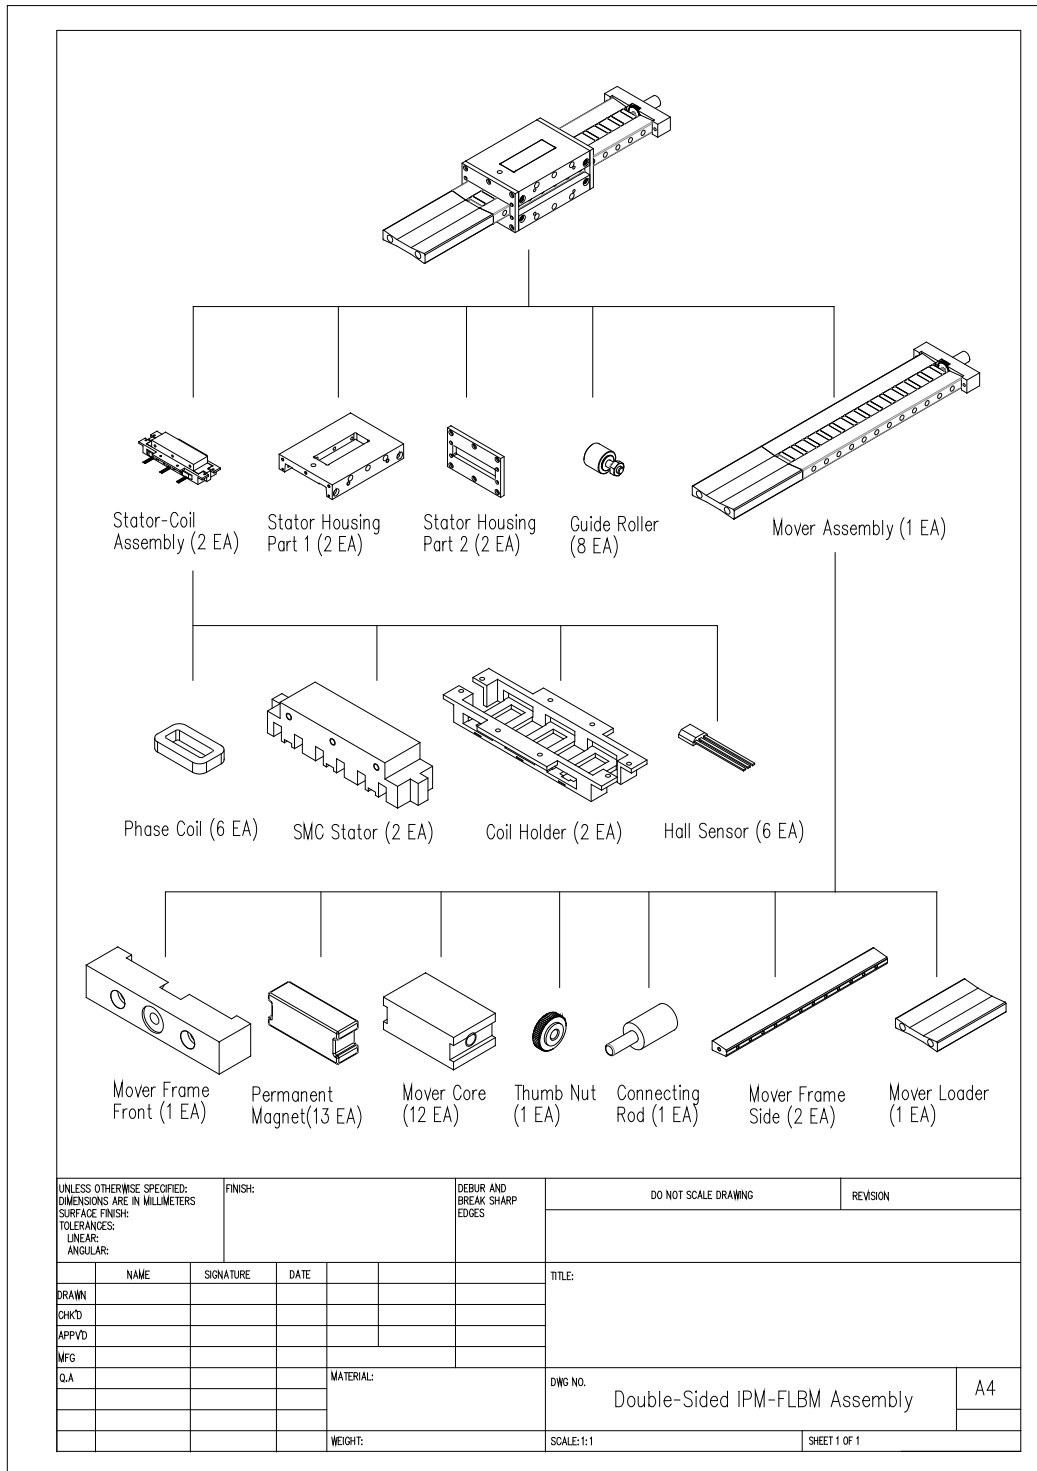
Components of the double-sided IPM-FLBM assembly.
